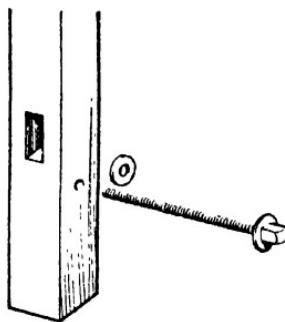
HOW BOLTS HOLD FRONT AND BACK LEGS TO RAILS.
